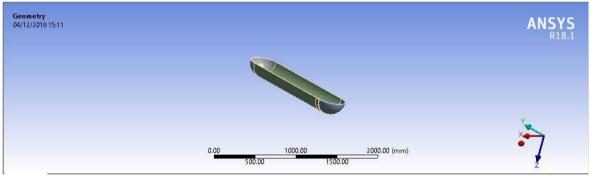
Geometry of the pressure vessel reactor with a Butt welded joints
